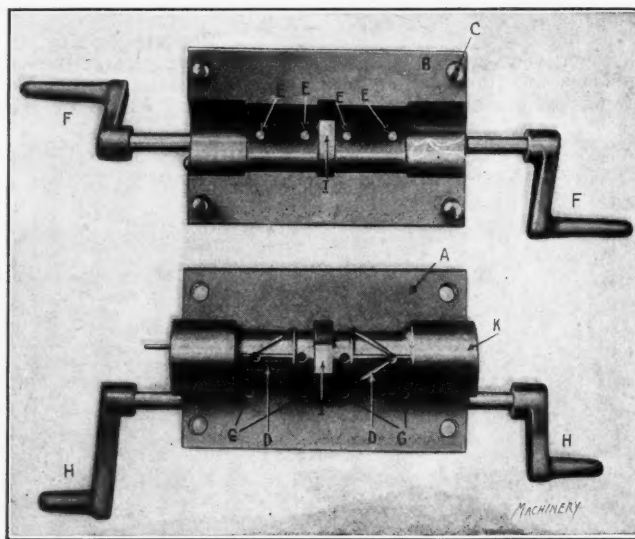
Die used by H. H. Franklin Mfg. Co. for Producing Bearings by the Die-casting Process
